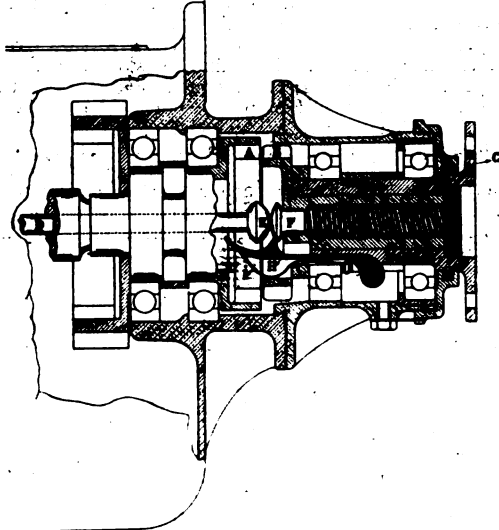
Sectional View of Additional Clutch at Rear of Gear Box on Germain Cars.
